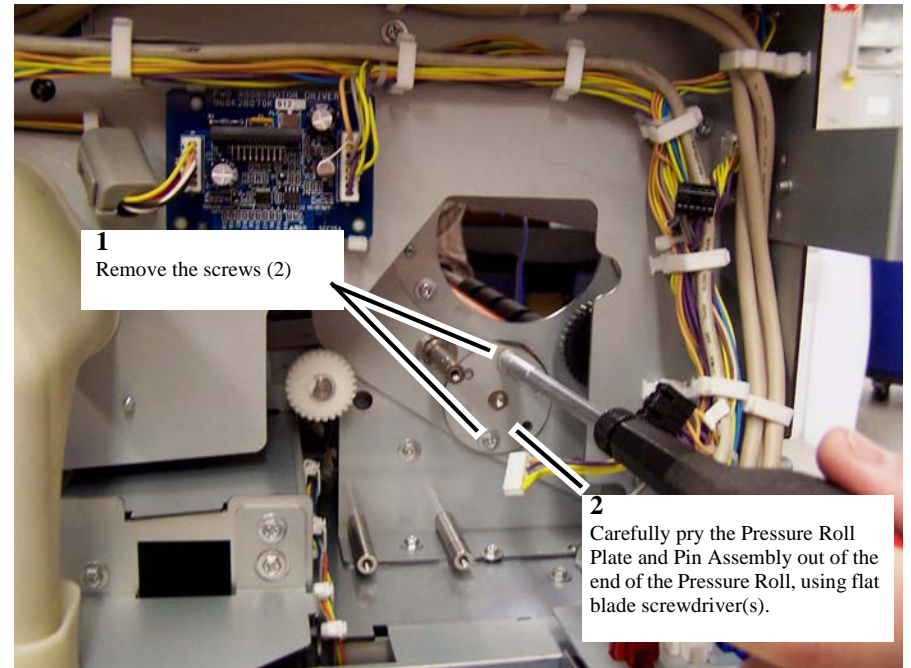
Removing the right end Pressure Roll Plate and Pin Assembly
